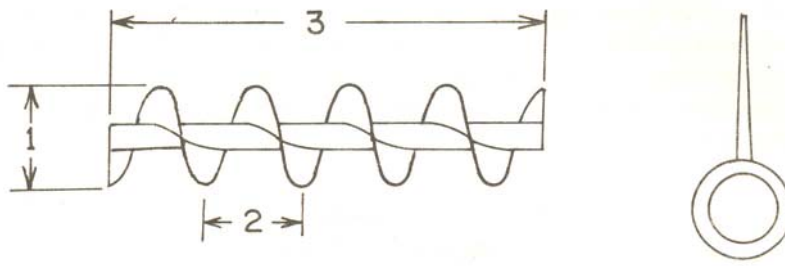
Screw conveyor-details: 1) Screw diameter, 2) Pitch of screw, 3) Screw length
